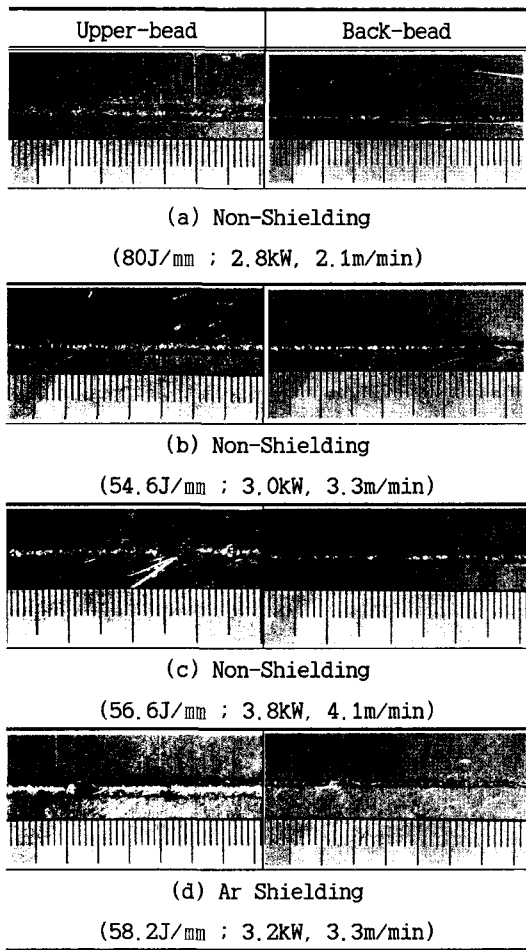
The shape of upper and back-bead on 6061 aluminum alloy laser weld coupons.
